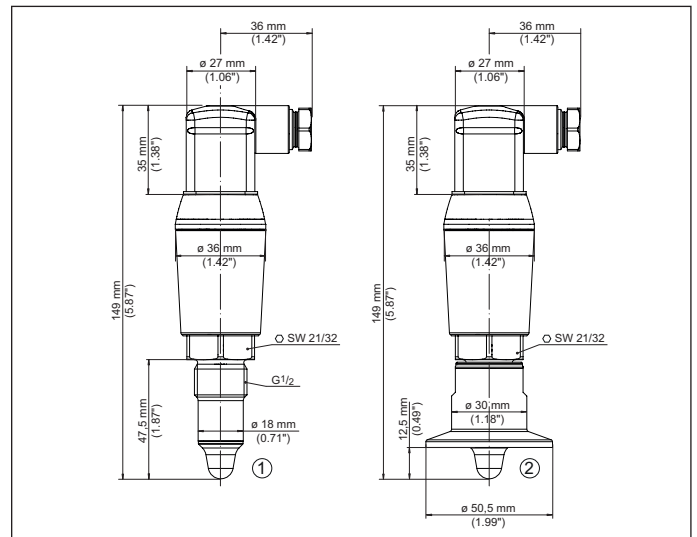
VEGAPOINT 31, hygienic version - thread with ISO 4400 plug
